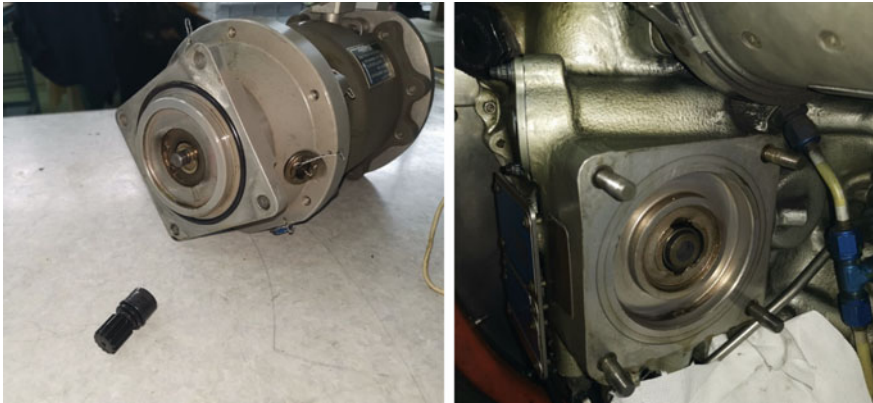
Failure of compressor—shear pin broken; split shaft left in engine accessory gear
